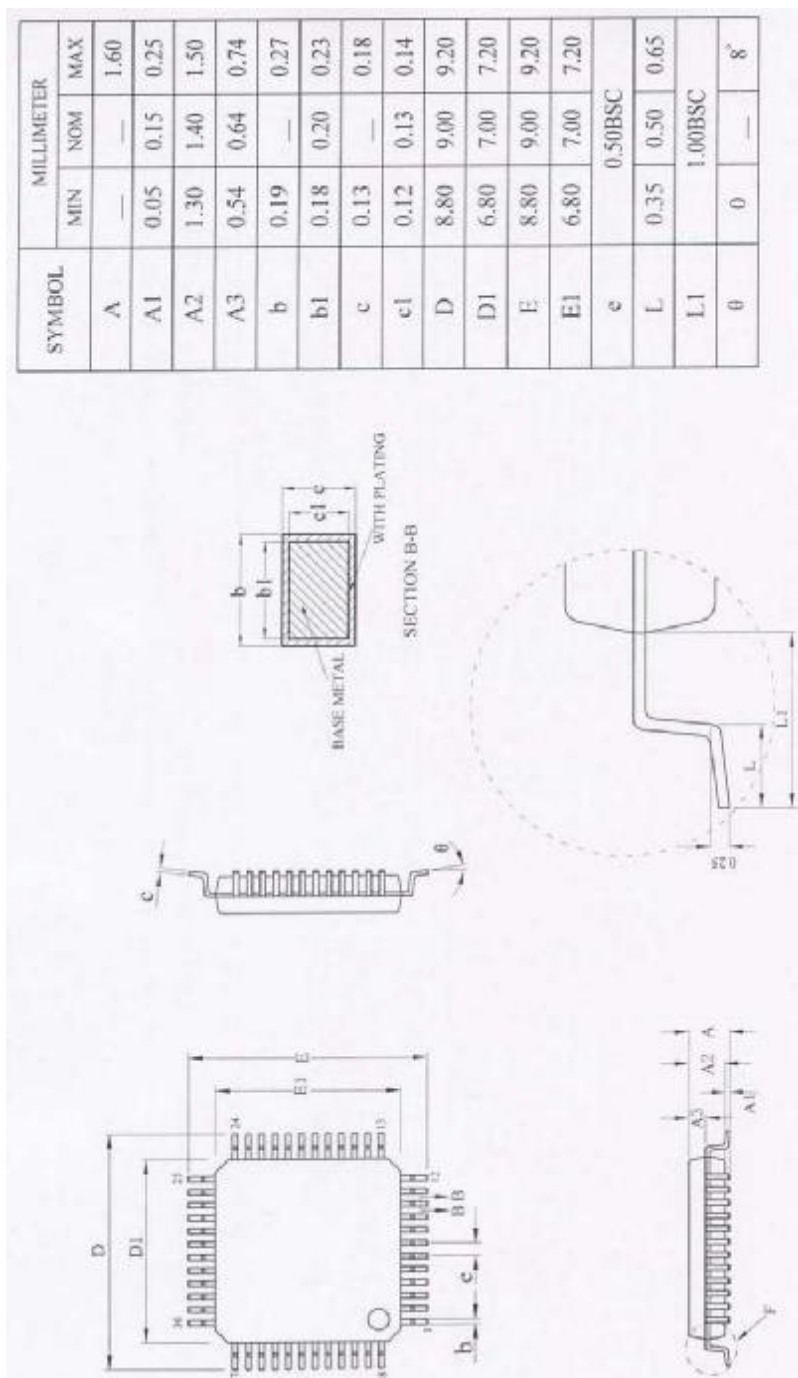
LQFP48-7x7mm Package Dimension Parameter
